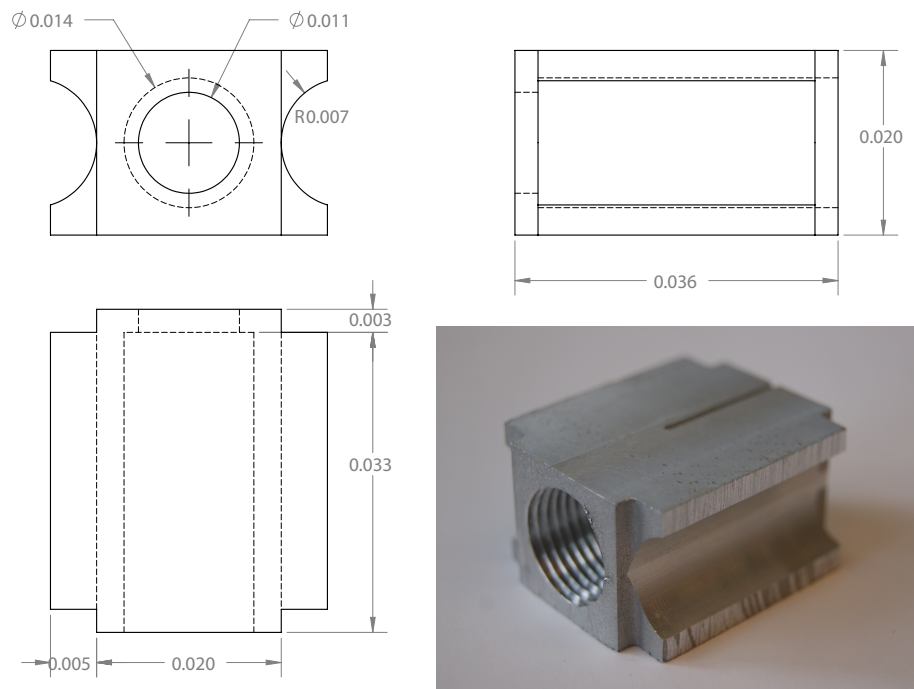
A dimensioned drawing and image is shown of Reactor 2. Units are in meters.
